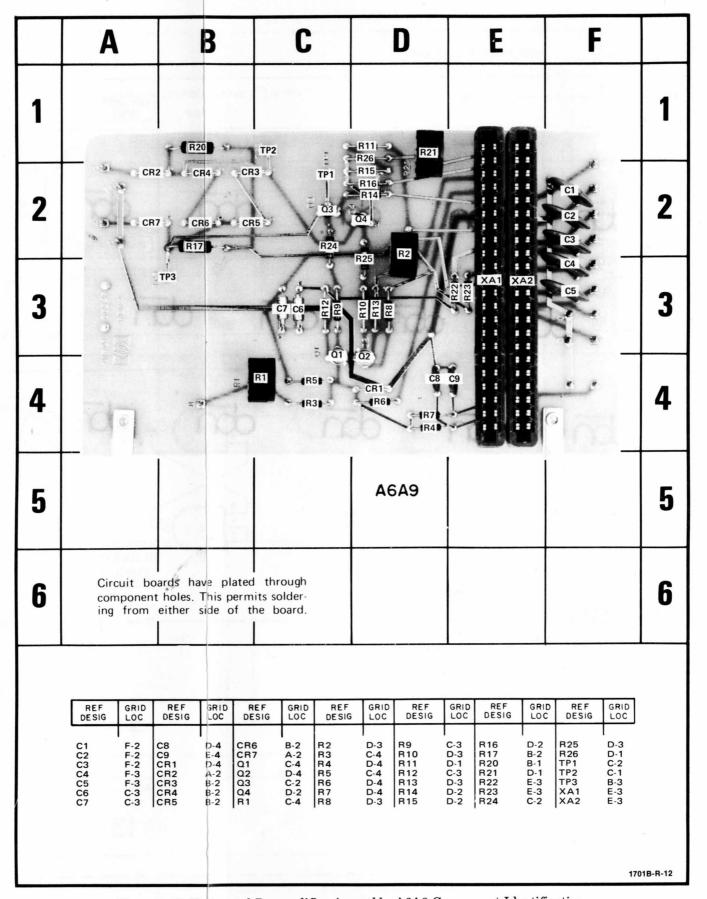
Horizontal Preamplifier Assembly A6A9 Component Identification
